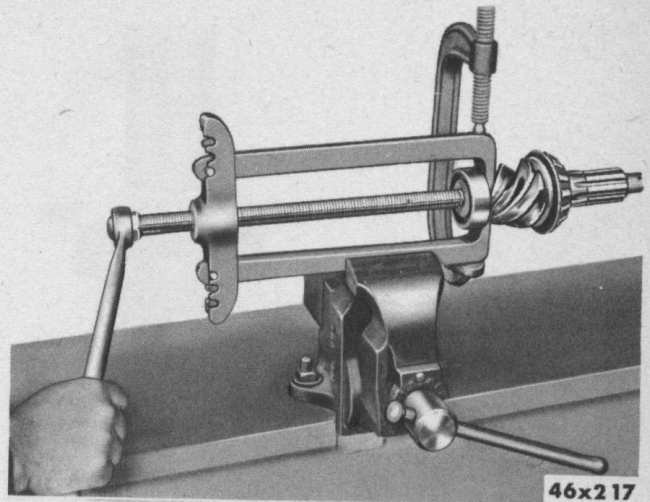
Removing Rear Drive Pinion Bearing Pilot—Tool C-549
